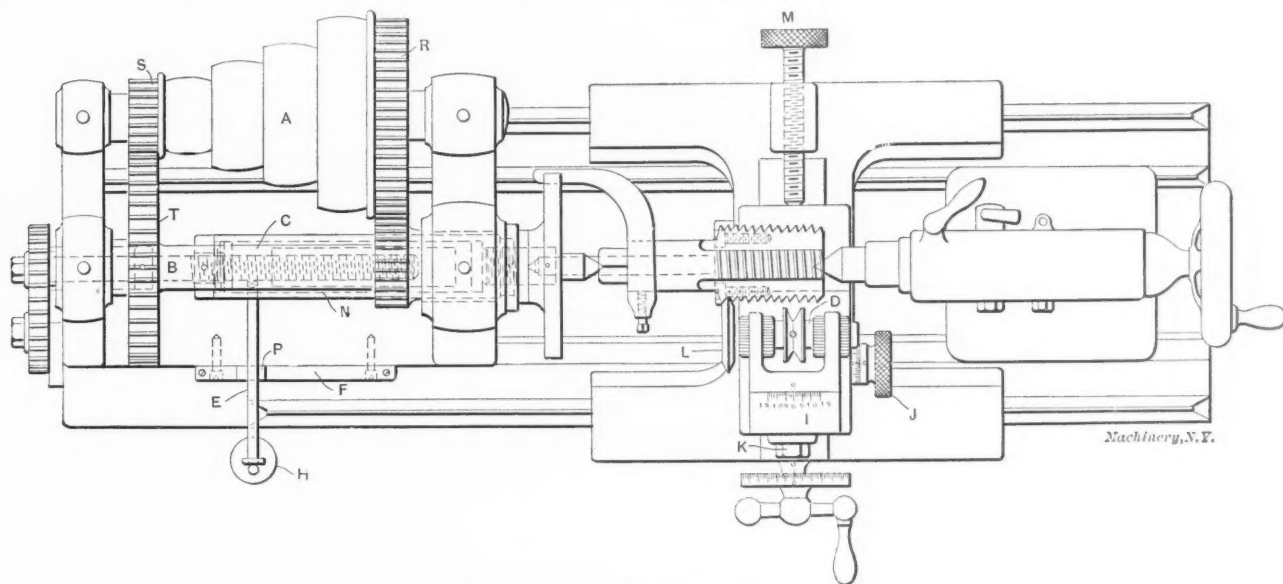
Lathe for Grinding Taps in the Angle of the Thread.
